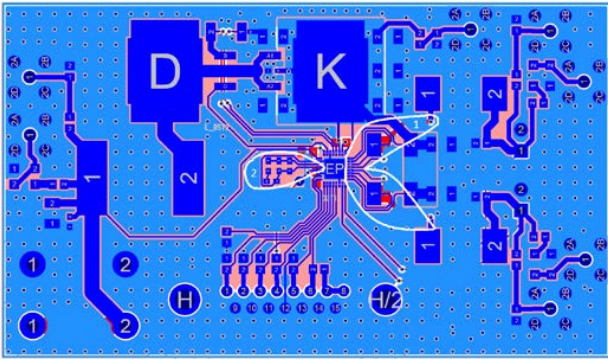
NCV78763 PCB Layout Example: areas (E) and (F)
